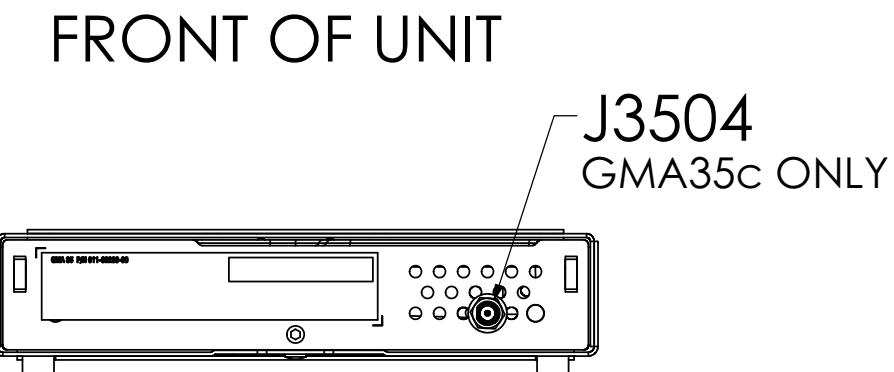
GMA 35c Bluetooth Connector Layout Detail - Front View
